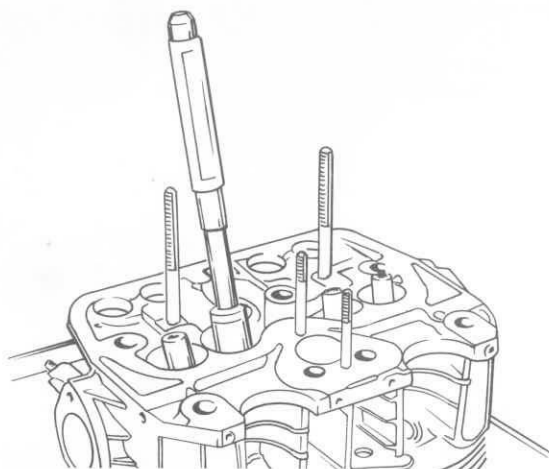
12 Driving valve guides into place using Fiat tool A.60153/1 with adaptor A.60153/6A
